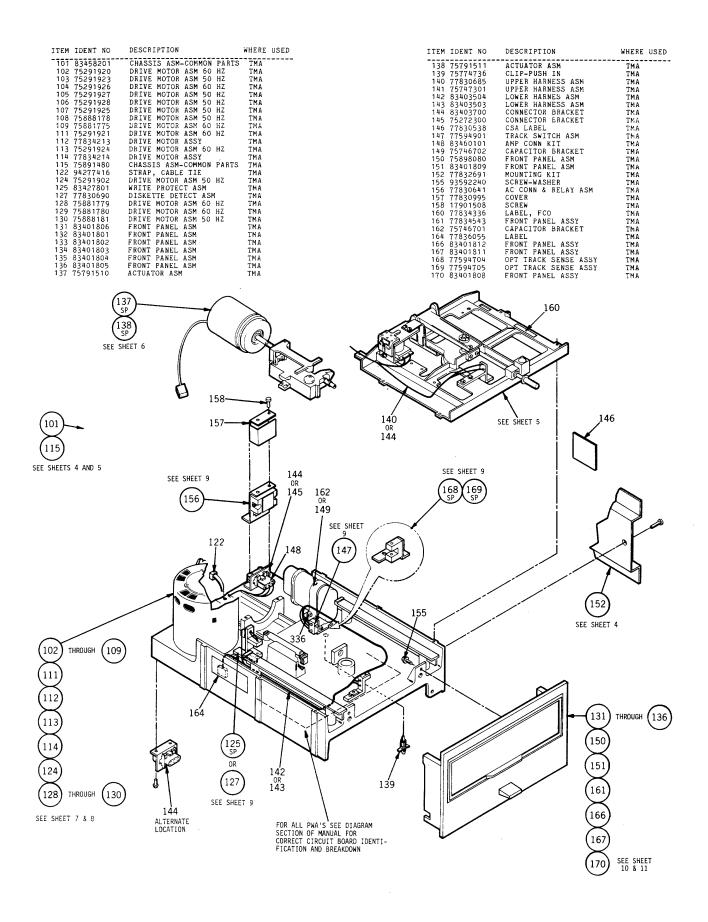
TOP MECHANICAL ASSEMBLY
